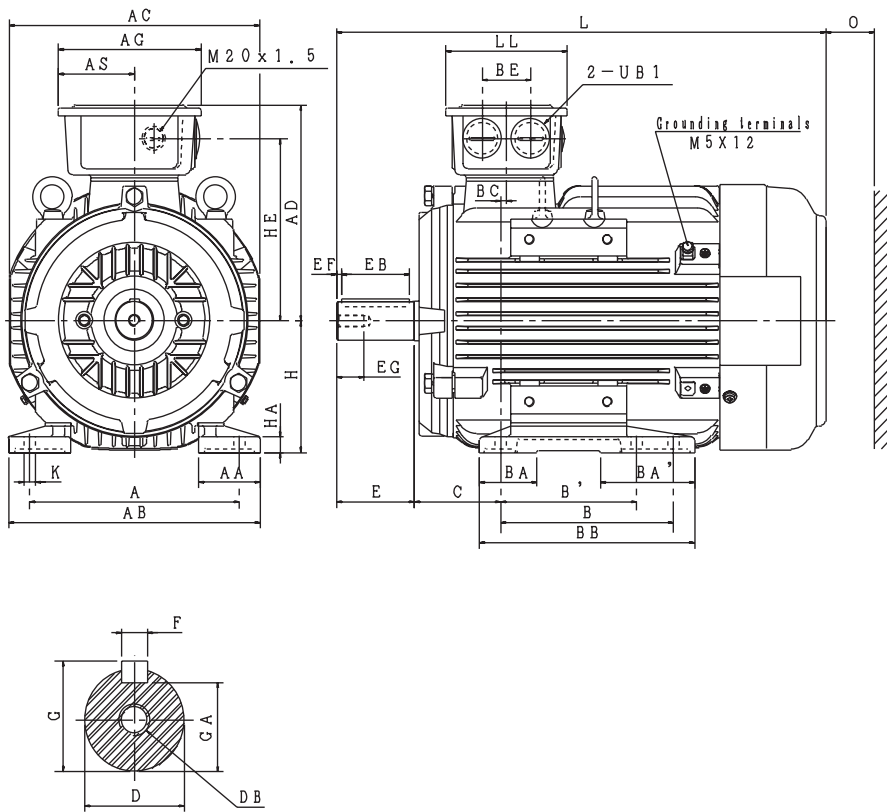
Outline drawing of cast iron design, feet version, mounting B3; frame size 160M – 180L
